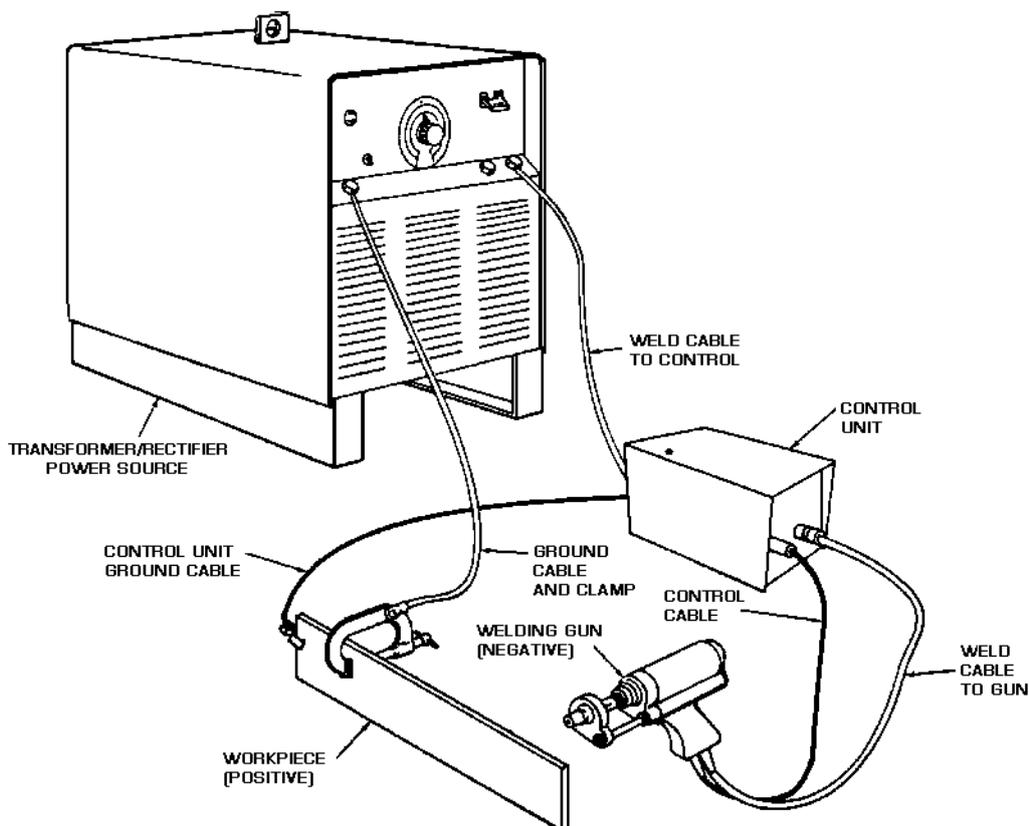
Equipment Set-up with Separate Power Source and Control Box
